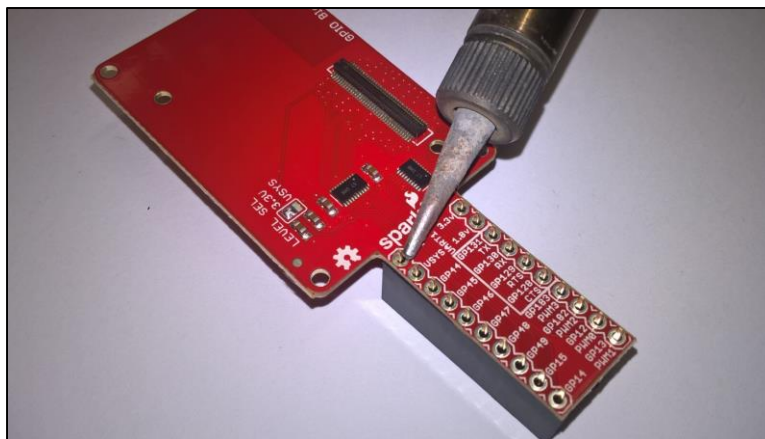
Applying hot soldering iron tip to GPIO board and pin contact point
